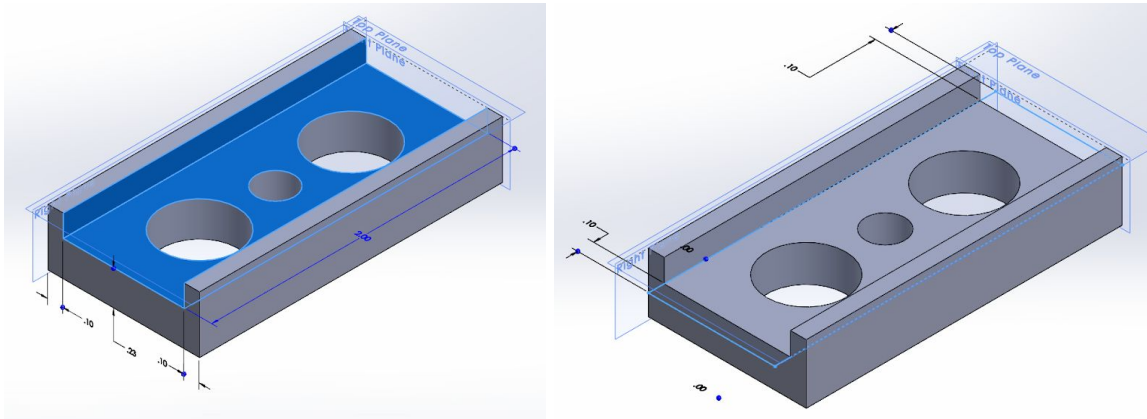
Extruded bottom of the housing and the final SolidWorks model.
